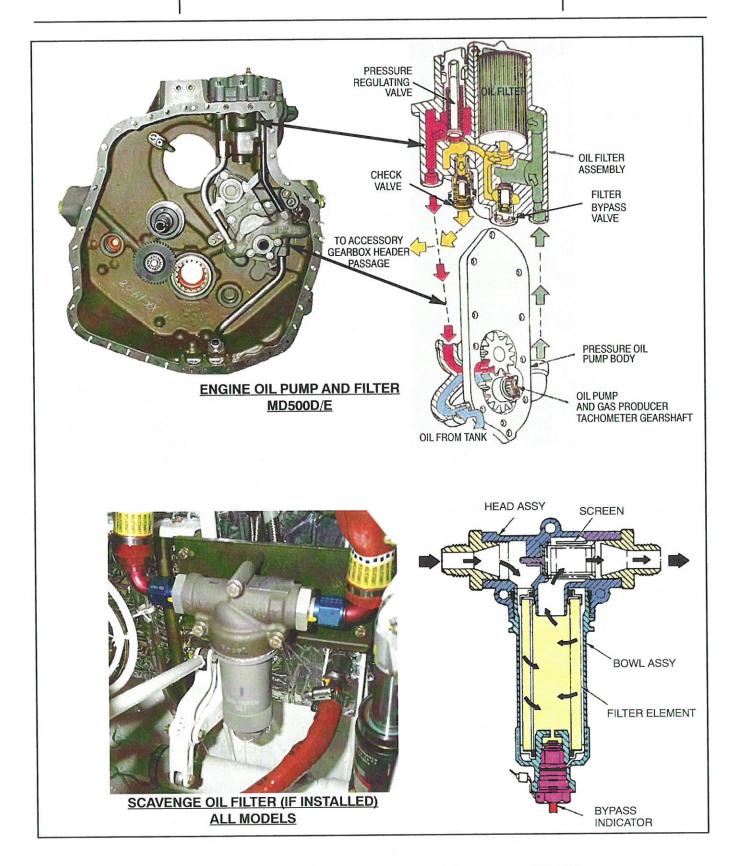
Engine Oil Pump/Filter and Scavenge Oil Filter
